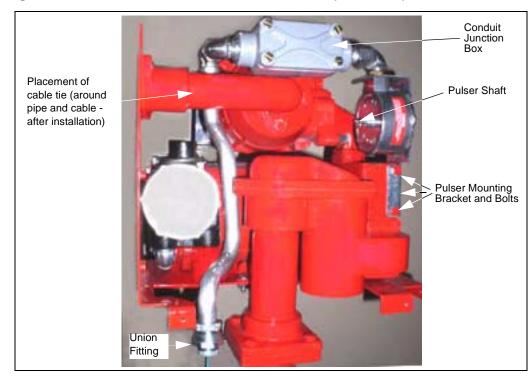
Placement of M06028A001 Pulser Module (Back View)
